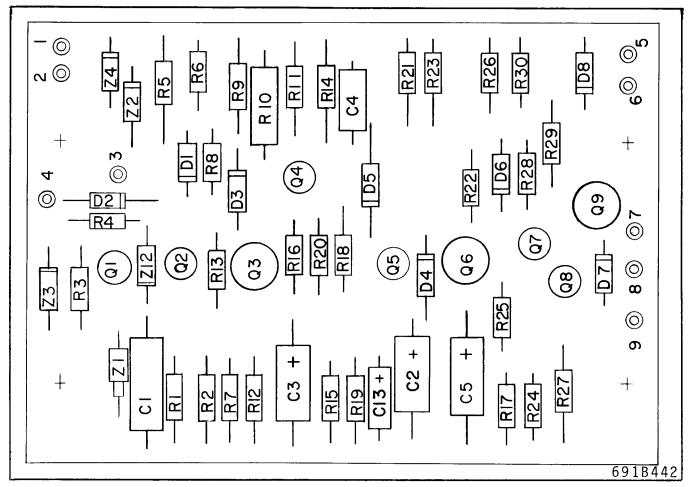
Component Location of Reset Printed Circuit Board for Type SGR-52 Relay
